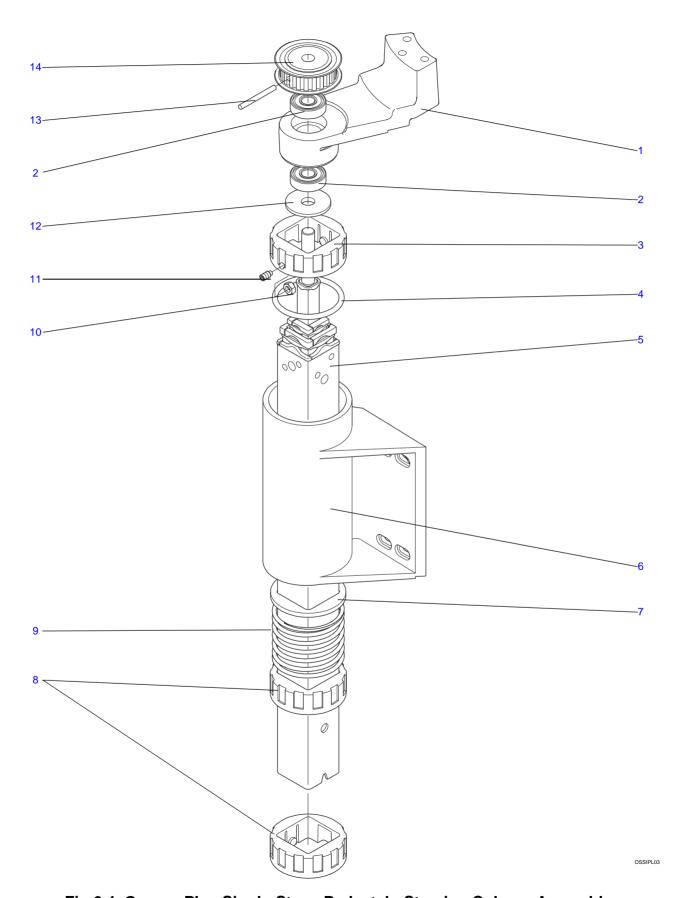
Osprey Plus Single-Stage Pedestal - Steering Column Assembly
